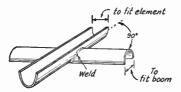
The elamp for the driven element is made by splitting 1-foot lengths of iron pipe and welding them as shown.
